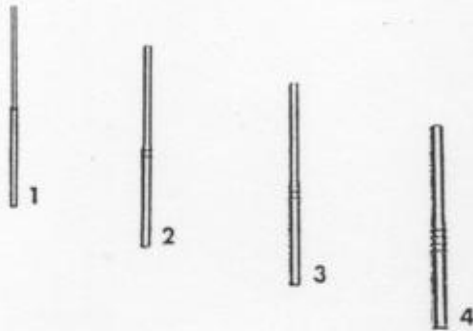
Gauging Pins Nos 1 to 4 for Checking Flyweight
